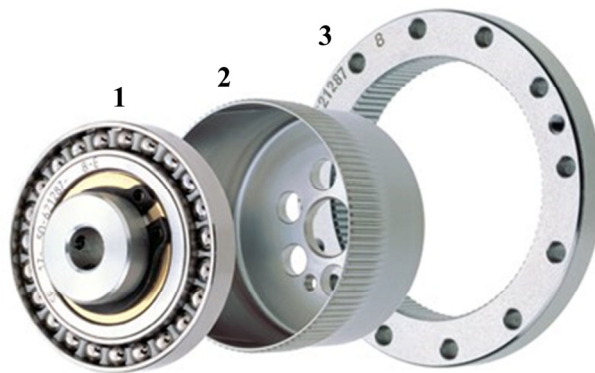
Cylindrical strain wave drive unit's main elements: flexible bearing and wave generator (1), wave gear (2), rigid gear (3) [1].
